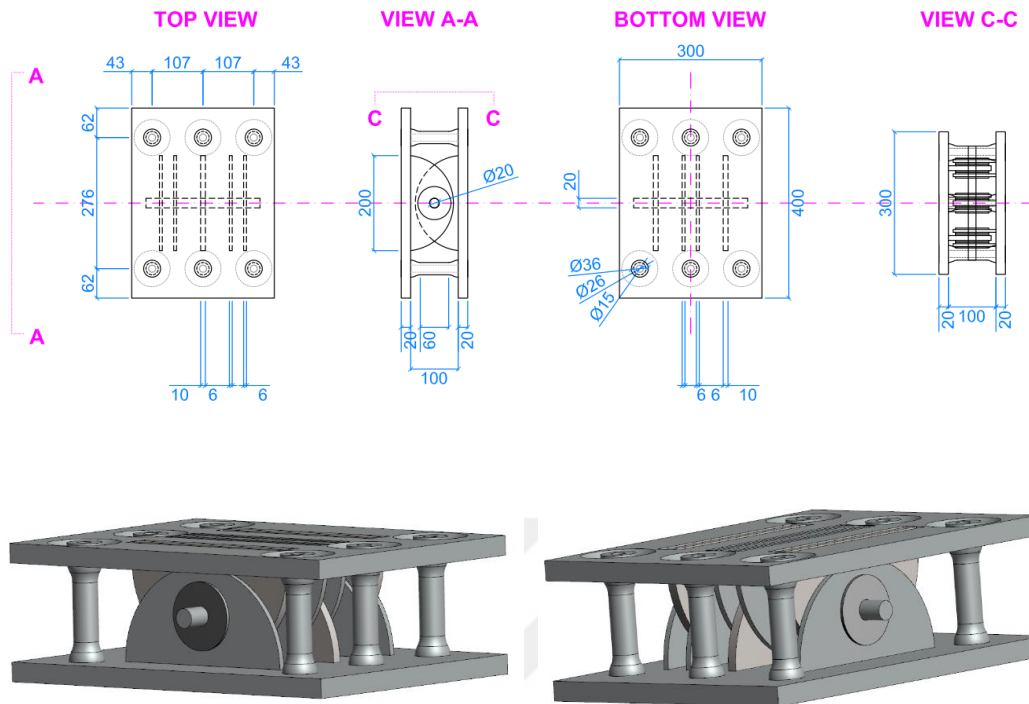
2D and 3D views of PT2A. Dimensions in mm.
